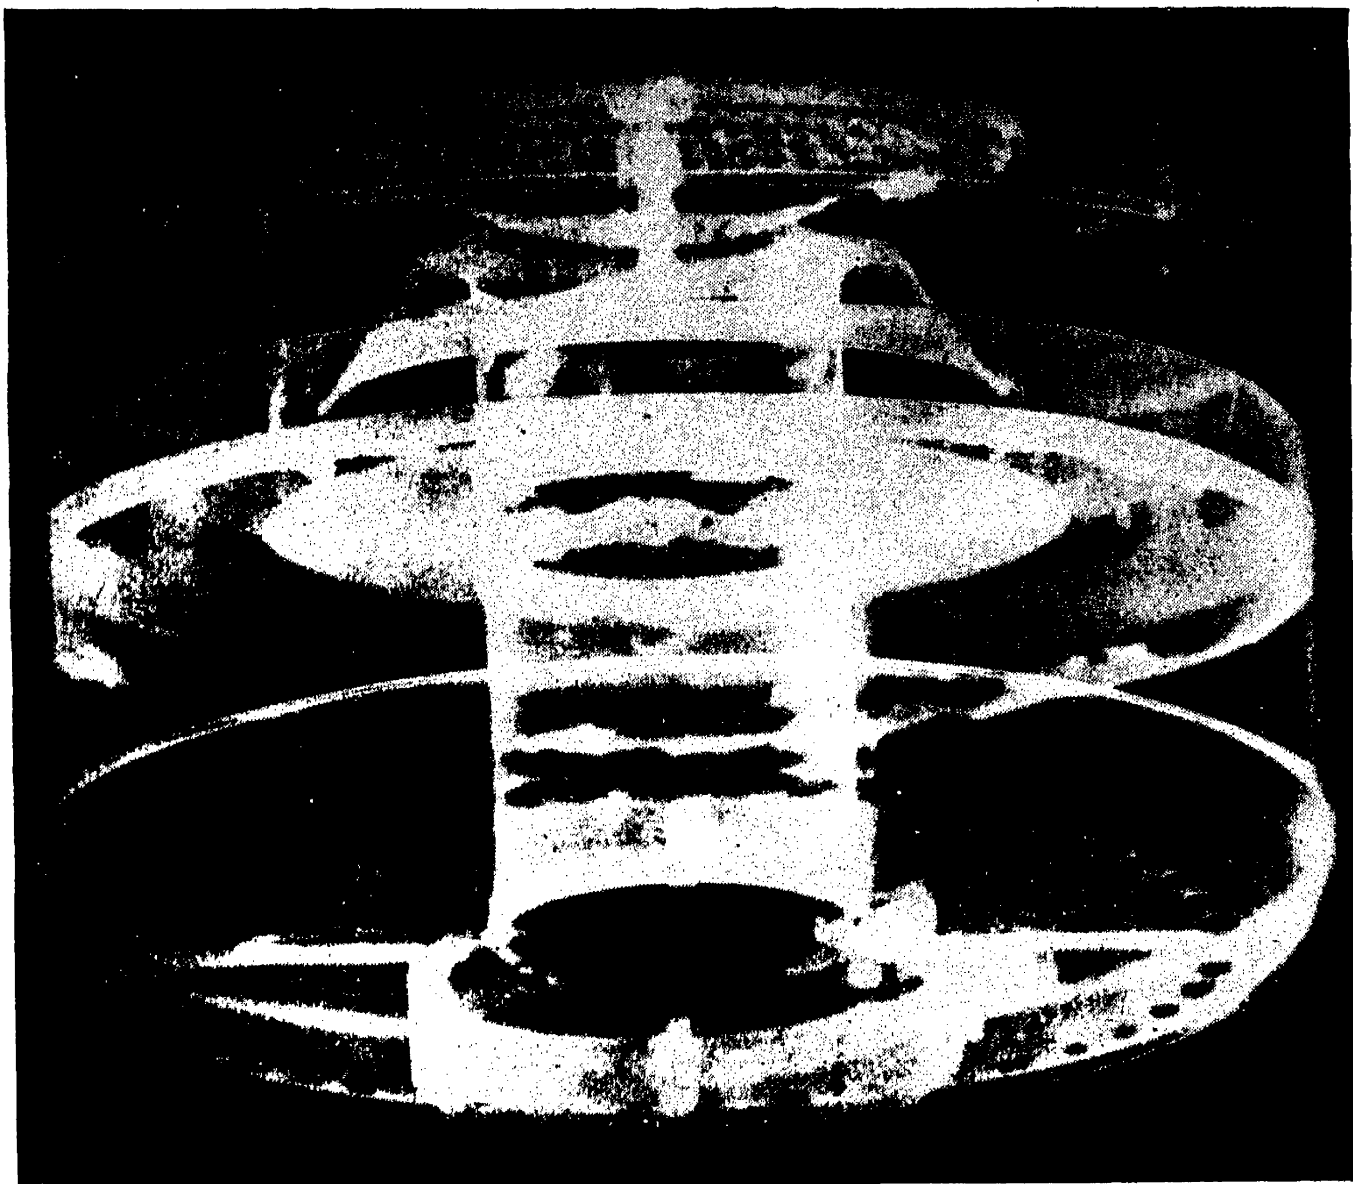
Radiograph of welded intake silencer—air cleaner.
